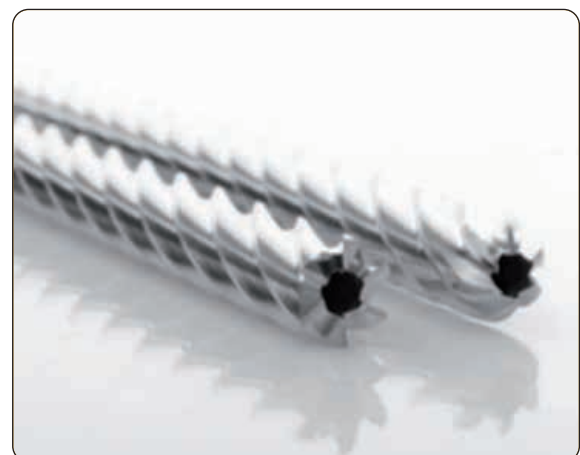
Front cutting reamer (Left), rounded reamer (Right)
